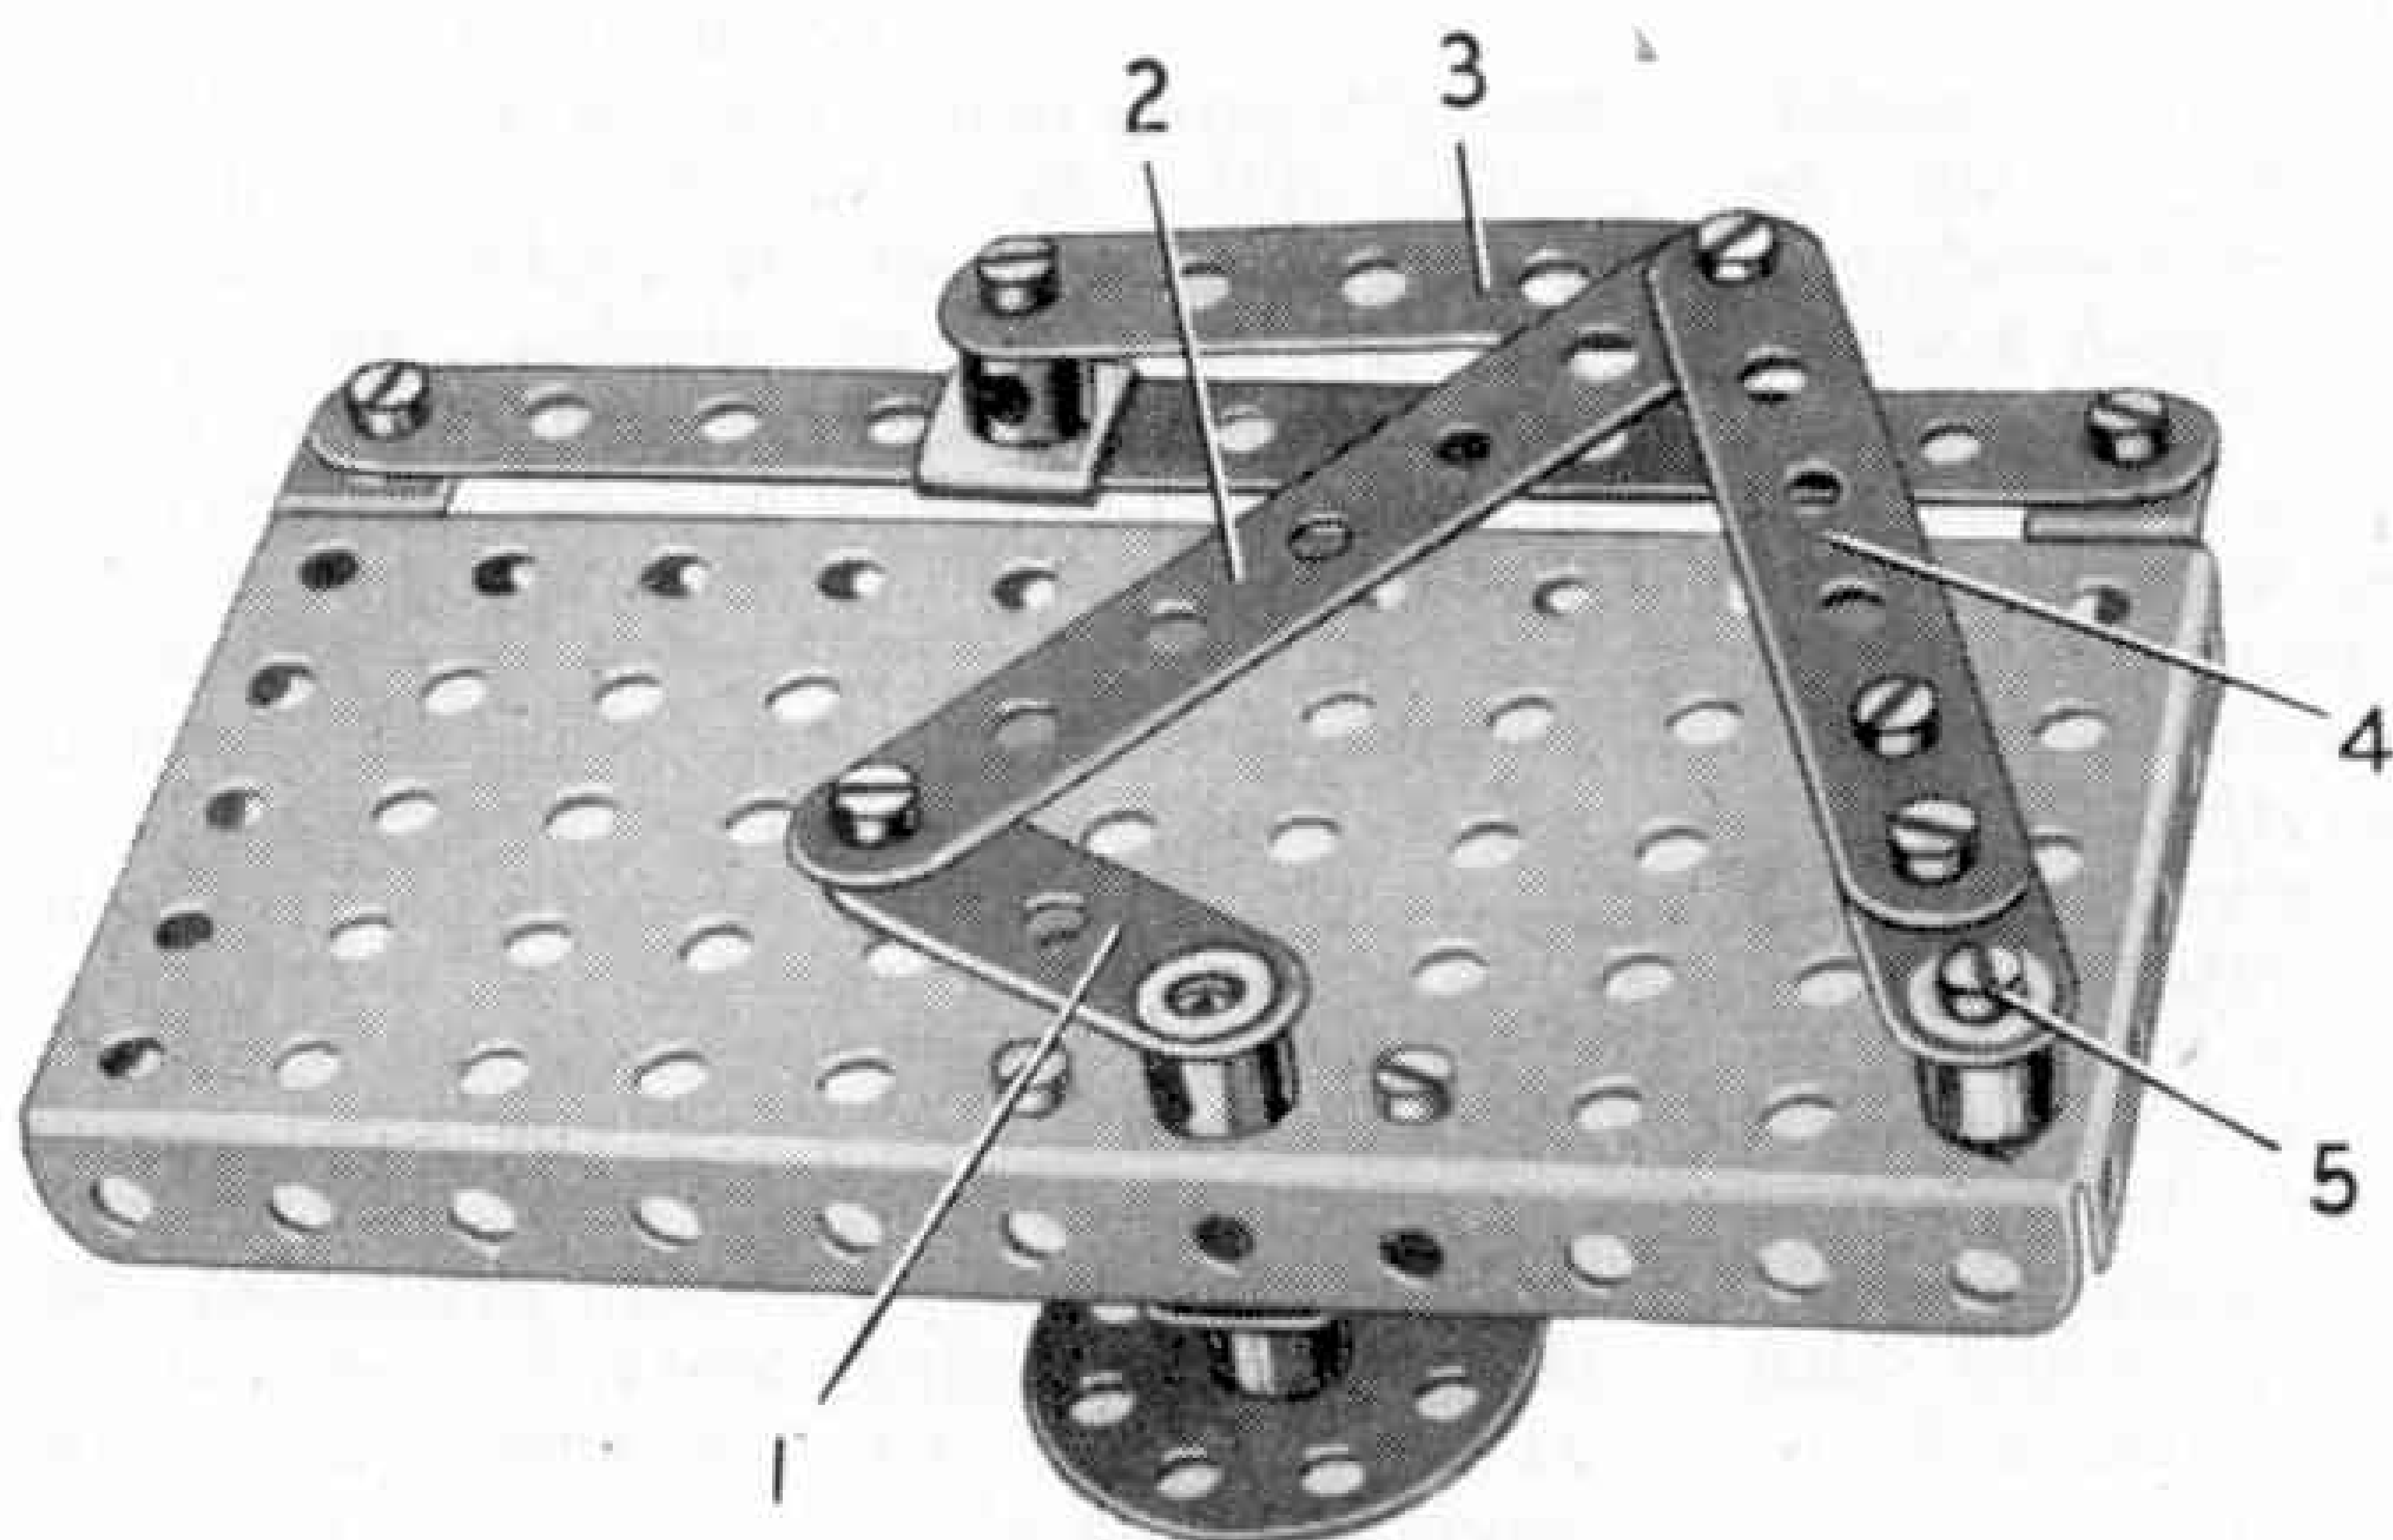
A quick return mechanism of unusual design, suitable for use in planing machines and models of other machine tools.
